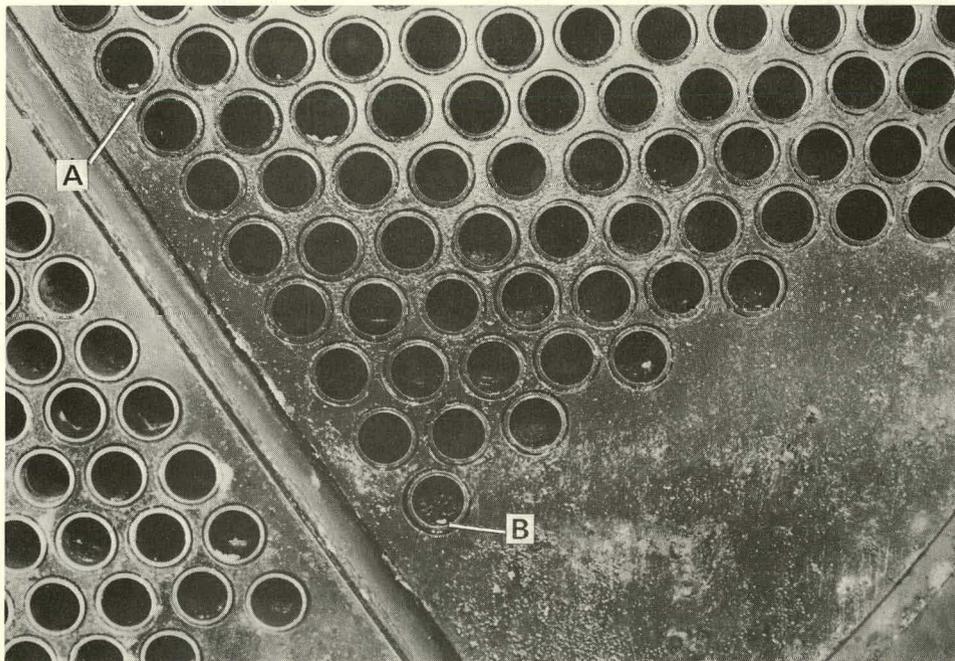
Close-up View of Melter-Condenser Showing (A) Corrosion Product between Tube and Tube Sheet and (B) Debris in Tubes.
